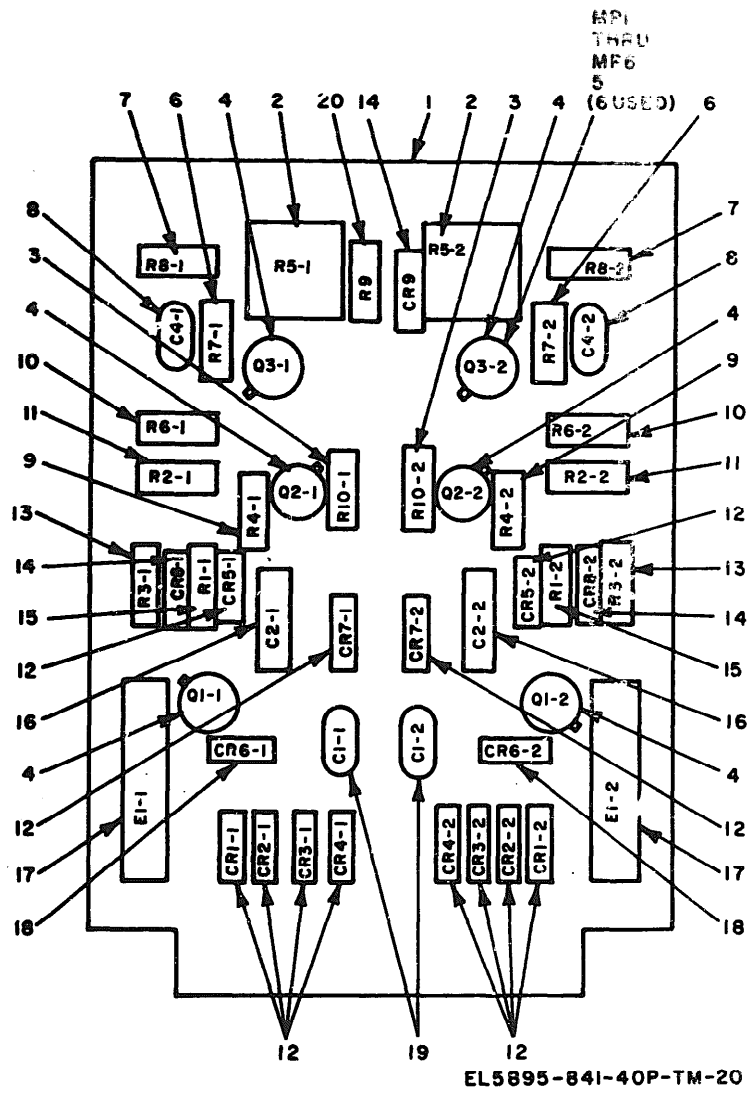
Circuit Card Assembly (SSS1 single-shot) 398-6607-10101.
